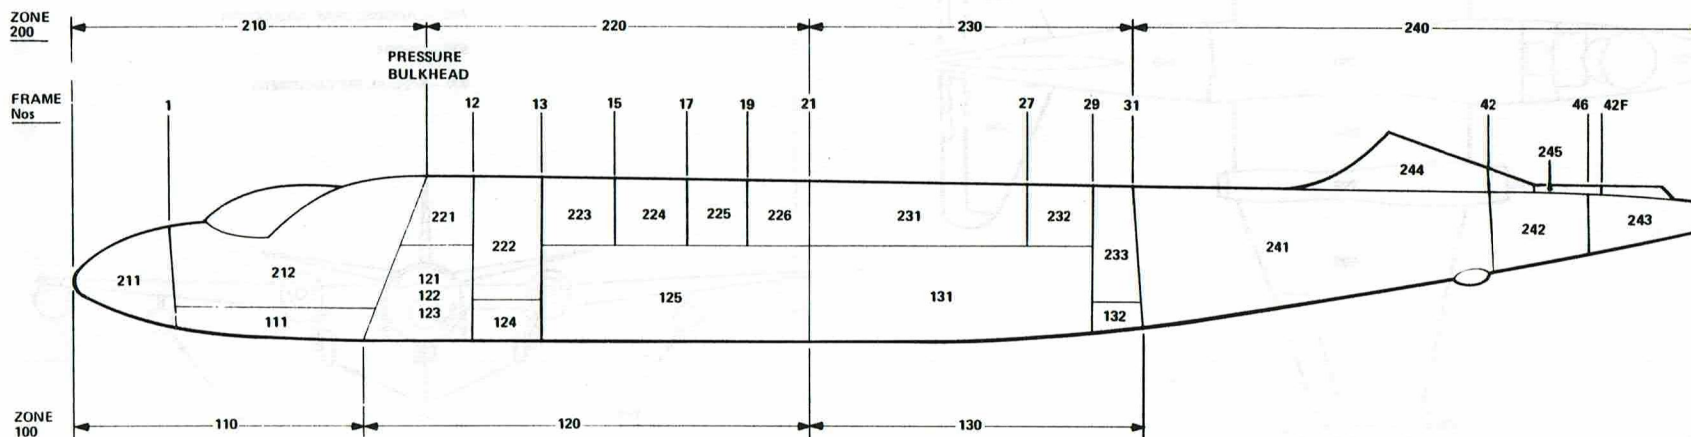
MAJOR ZONES - LOWER AND UPPER FUSELAGE
